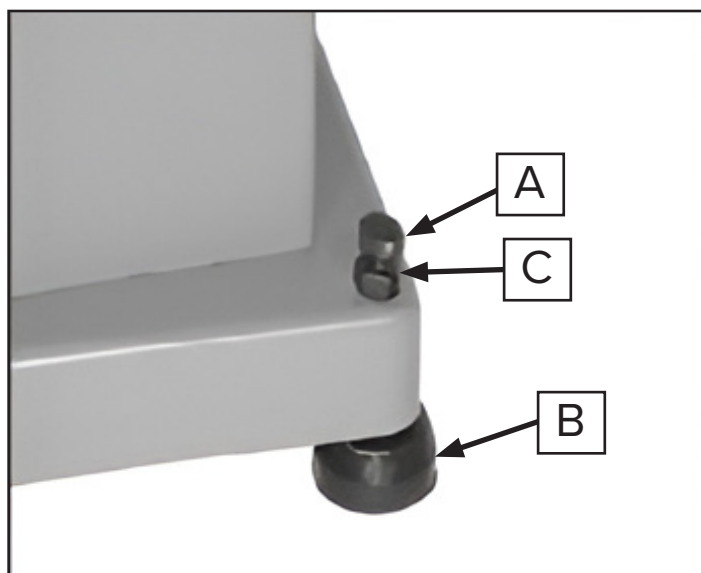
Machine leveling nuts and bolts machine. Make sure the site is cleaned, and the floor is level. Use a forklift or any other lifting device rated to handle the weight of this machine. This planer is heavy, therefore use caution when handling it at all times. Before you move the machine into position make sure that:
